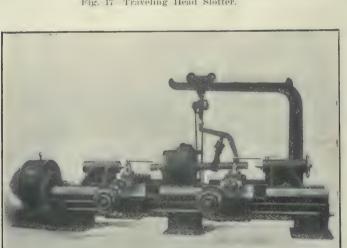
Double Axle Lathe. London Machine Tool Co., Hamilton.
